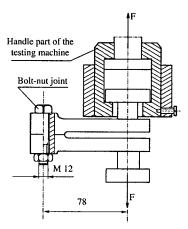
Specimen with the joint bolt-nut for the fatigue test.
